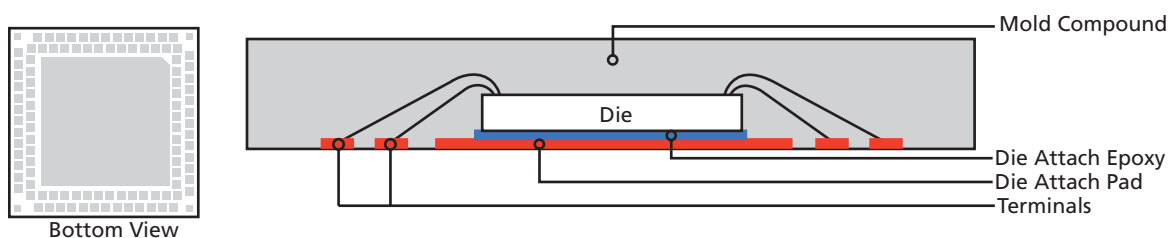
• Bottom View and Cross Section of Dual-Row QFN
